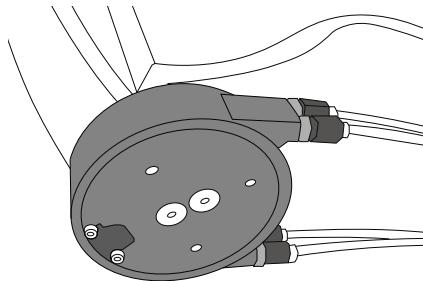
The four cables of the cable steering, divided into two cable sets.
